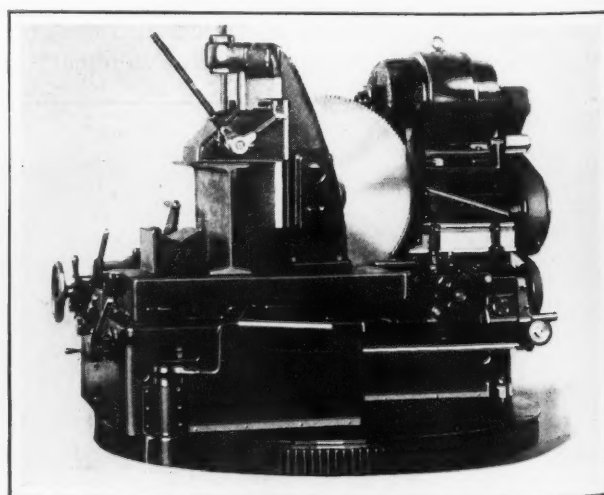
Sawing Machine Designed Primarily for Frog and Switch Work
